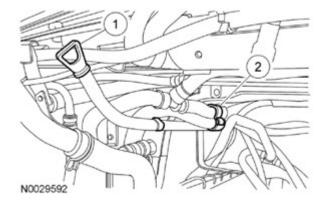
Locating Transmission Fluid Filler Tube Courtesy of FORD MOTOR CO.
